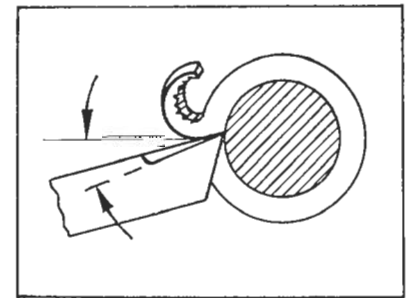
Effect of Rake on Shearing Action of Lathe Tool
